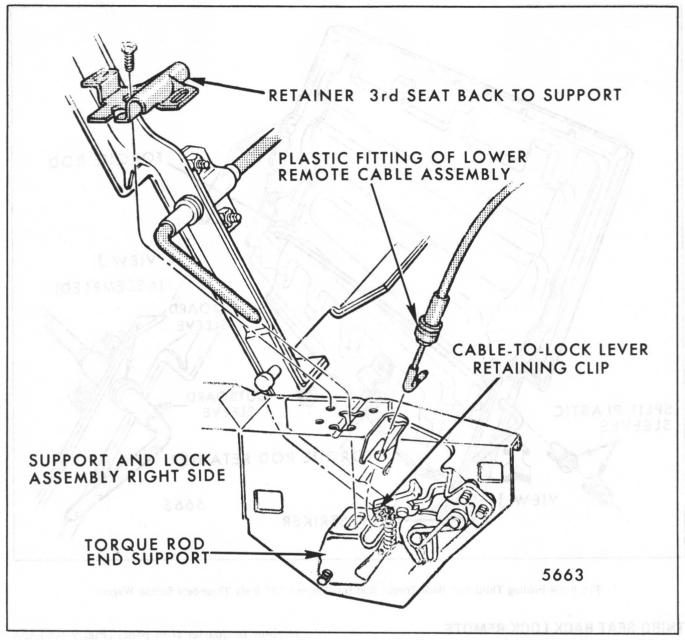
Folding Third Seat Back Lock Assembly and Remote Cable Attachment at Lock - "B" Body Three-Seat Station Wagons
